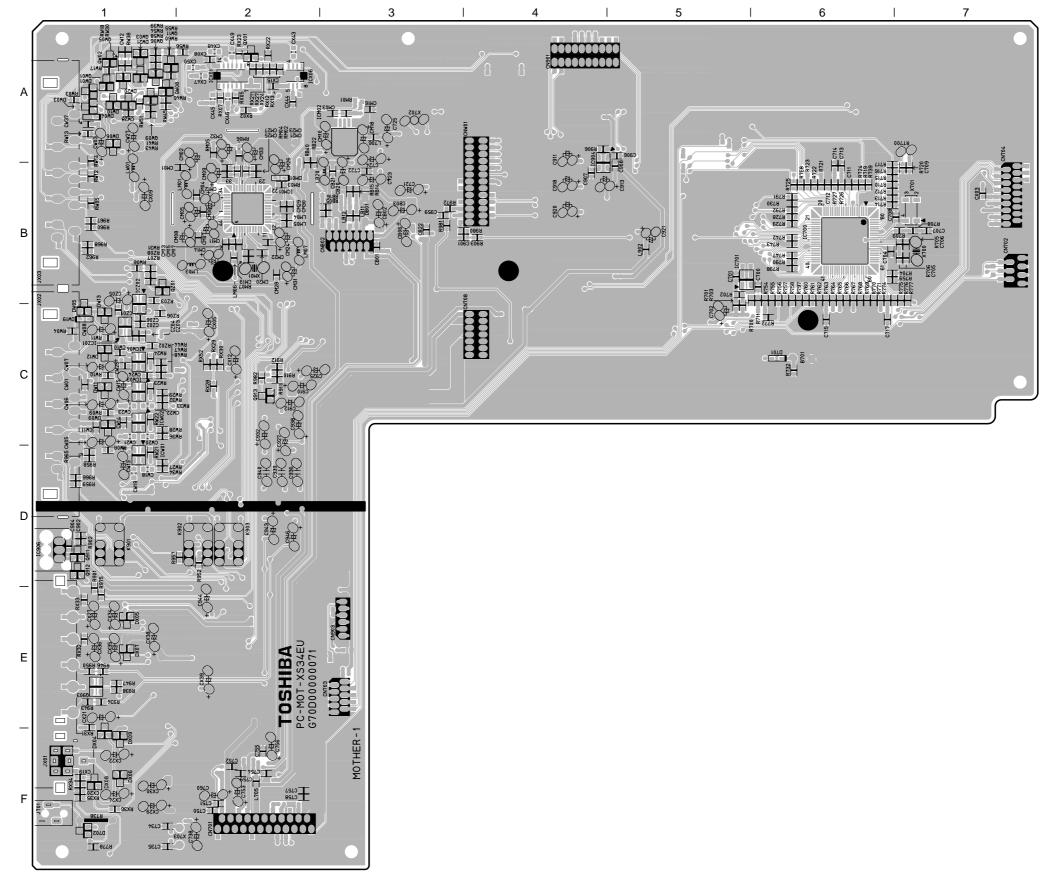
EU05 Mother PC Board (Bottom side)
